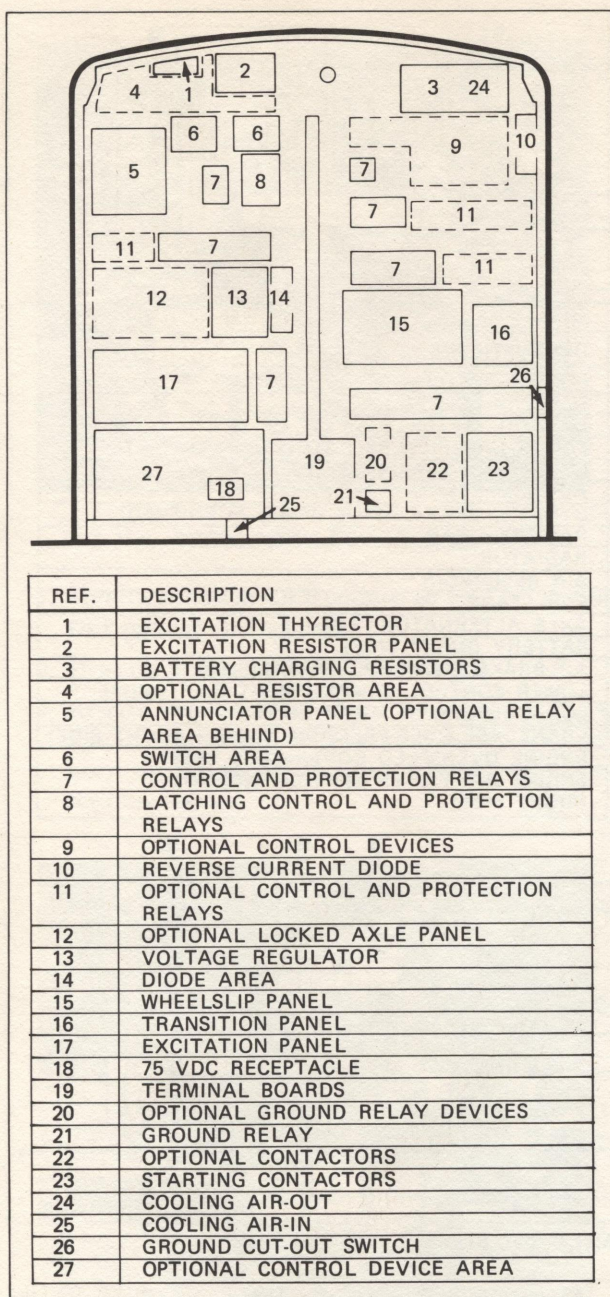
ELECTRICAL CONTROL COMPARTMENT EQUIPMENT ARRANGEMENT.
